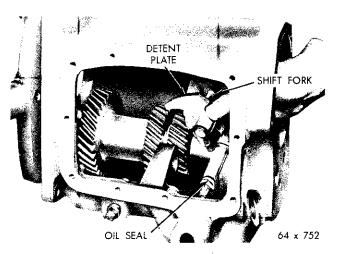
Removing or Installing Reverse Shift Fork and Lever
